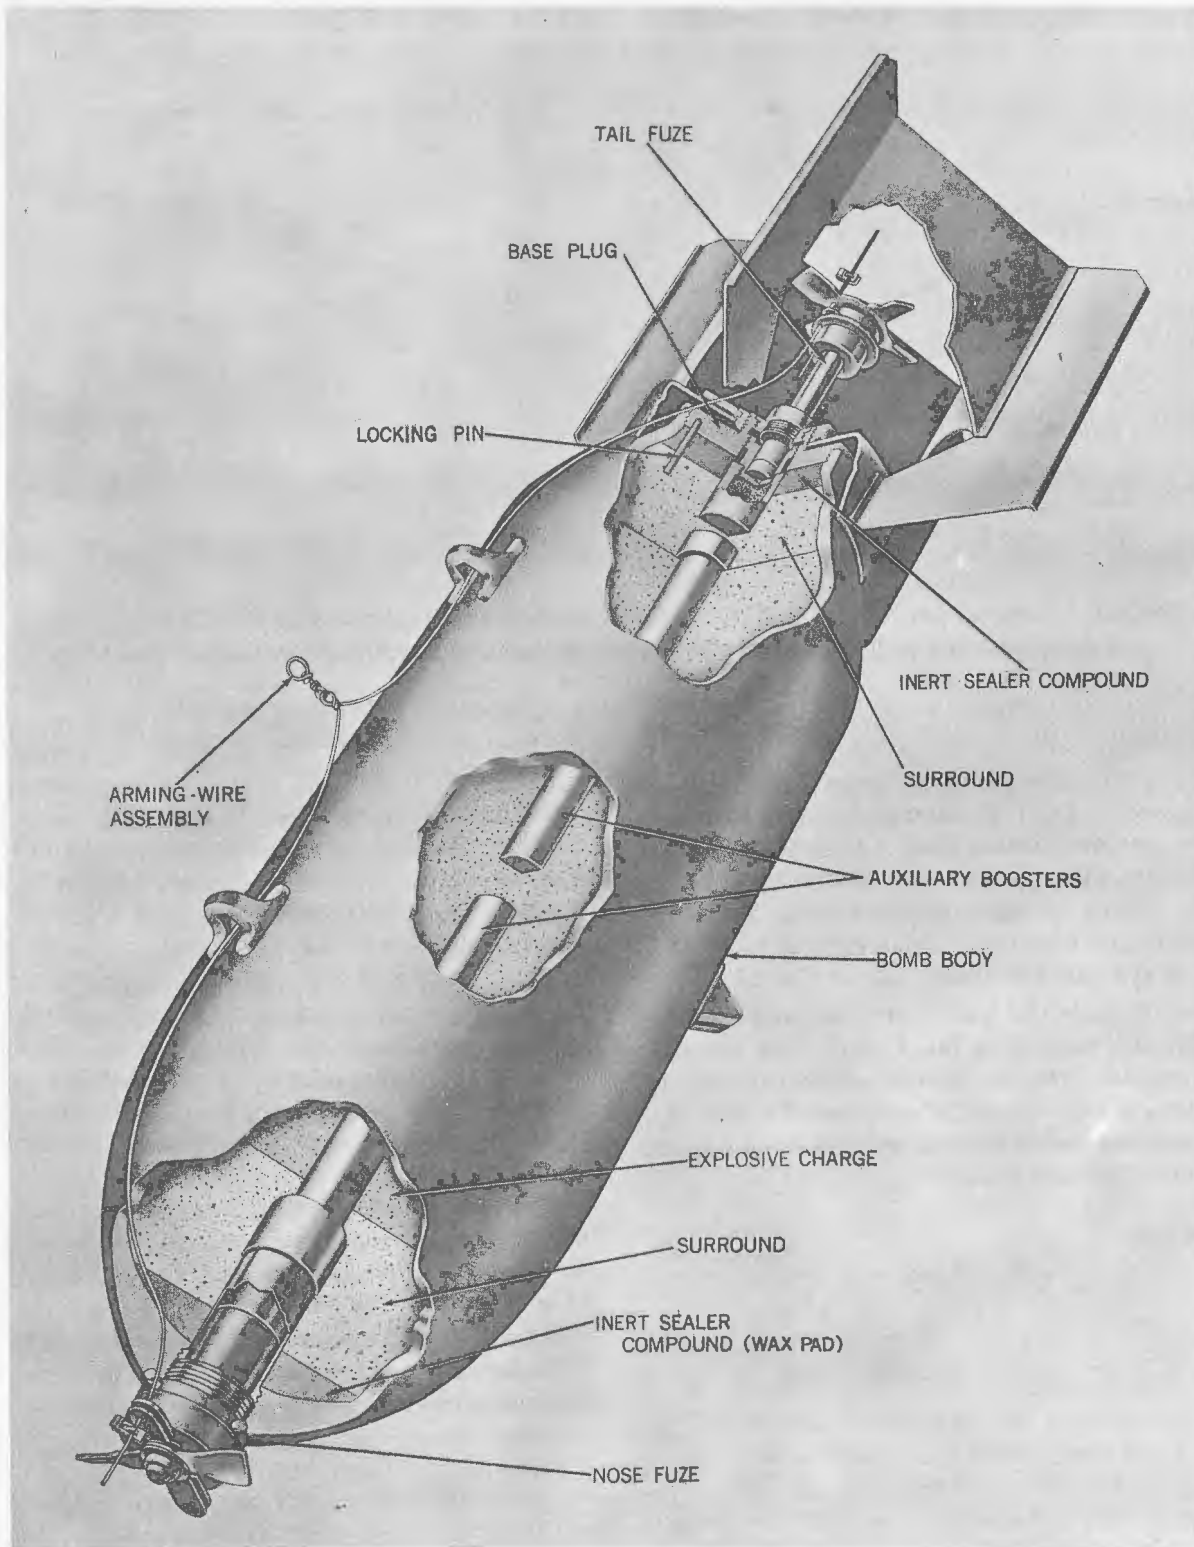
250-lb GP Bomb AN-M57A1 with Fin Assembly AN-M106A1, Cutaway View.
